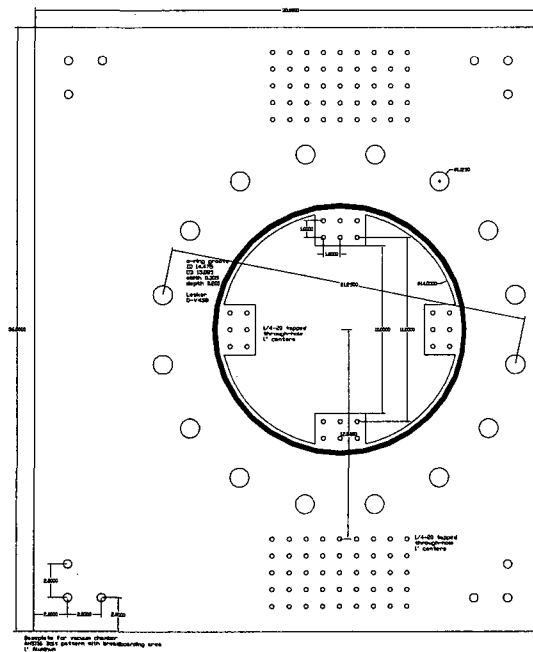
Dimensioned drawing of baseplate for chamber 1 (beam source). The baseplate is designed to seal to an ASA16-flanged gate valve (mounted below the plate) and to an ASA16 flange on the bottom of the chamber body (sitting on the baseplate). Breadboard areas inside and outside the chamber allow fixtures to be mounted rigidly. Height and tilt can be adjusted by supporting the baseplate through the holes at the corners with threaded rod and hex nuts.
